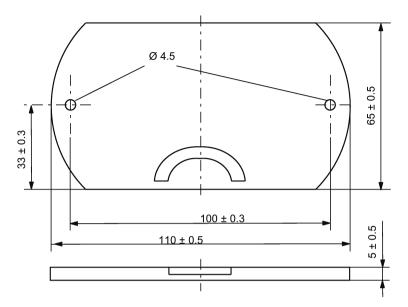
Dimension drawing of fixing pocket 6GT2390-0AA00
